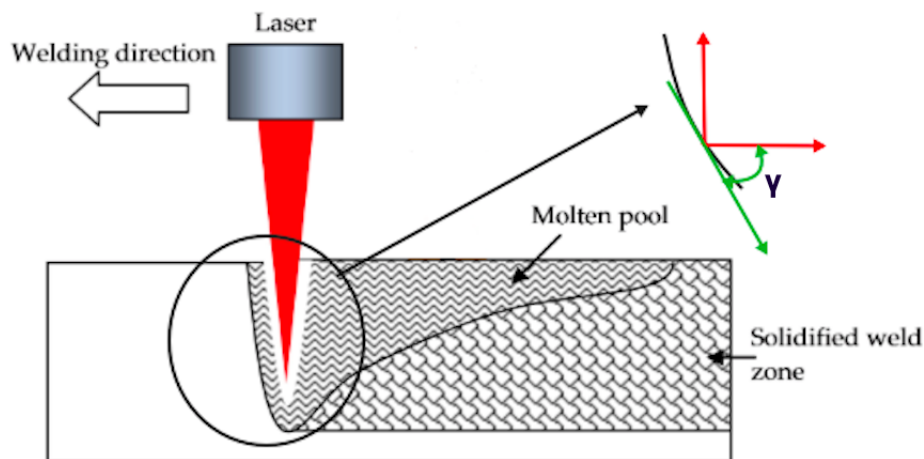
Inclined angle of the keyhole γ while laser welding [38]
